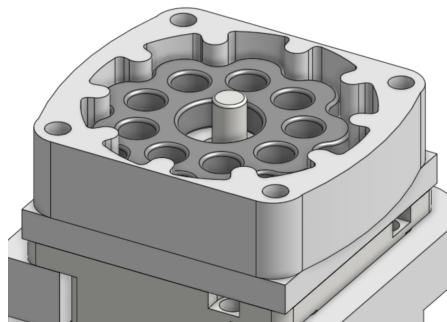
Cycloidal disc lowered into the housing with the input adapter engaging the motor shaft.
